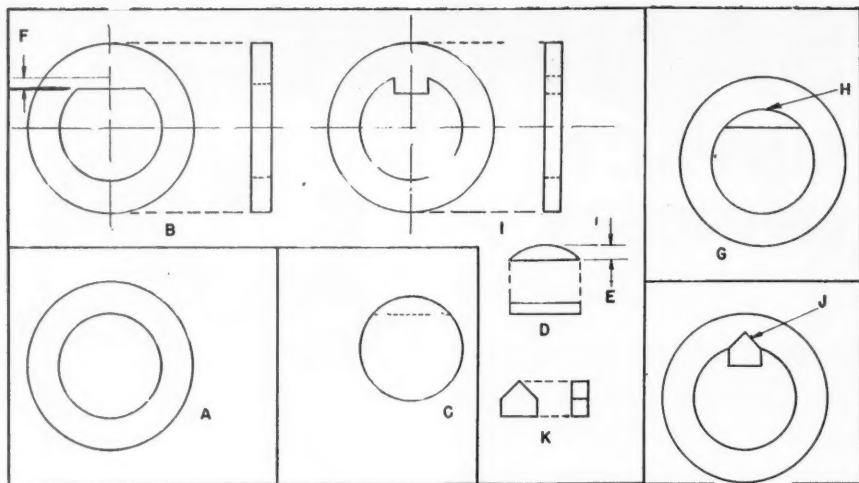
Drawings which illustrate fabrication operations involved in manufacture of stationary spacers.
